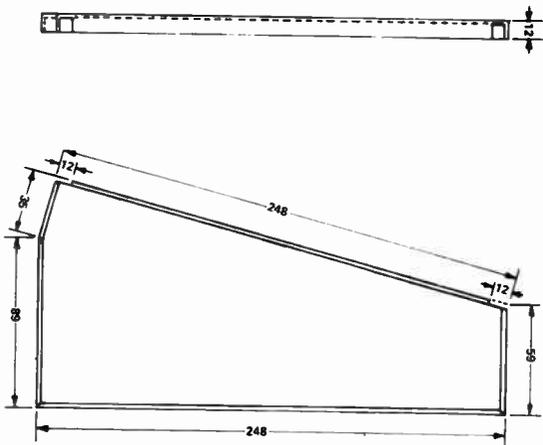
The end pieces for the box. These should be fitted into the ends of the box as shown in Fig. 3. The two ends should be of opposite hands.
